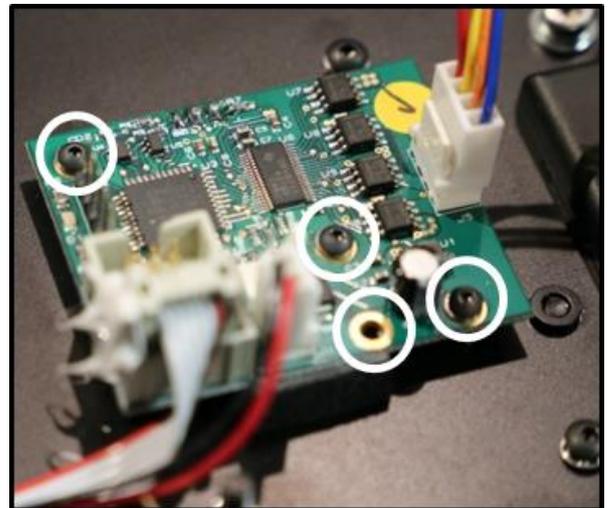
STEPPER MOTOR BOARD REPLACEMENT
